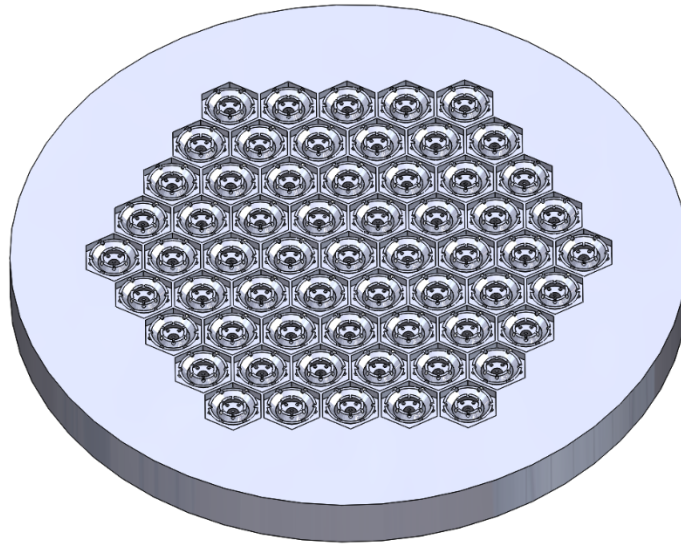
MIMO - Large Cavity AMM Panel - CAD - Horizontal Cross-Section View
